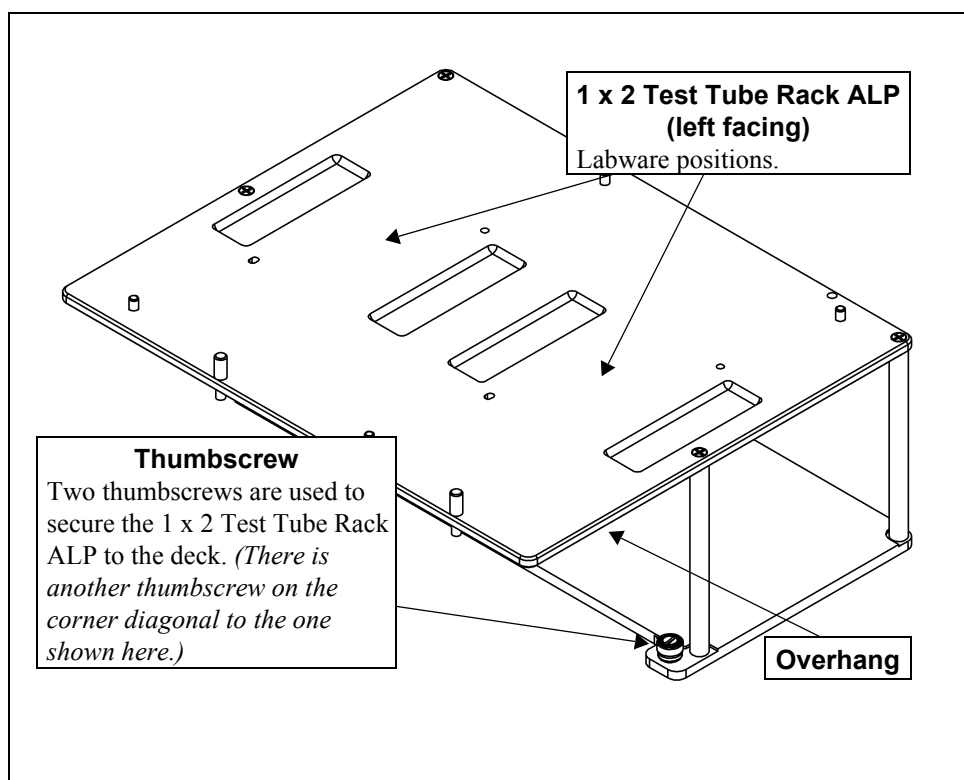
1 x 2 Test Tube Rack ALP (left facing)
